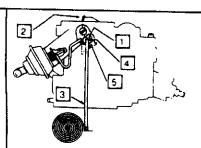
CHOKE COIL ROD ADJUSTMENT
